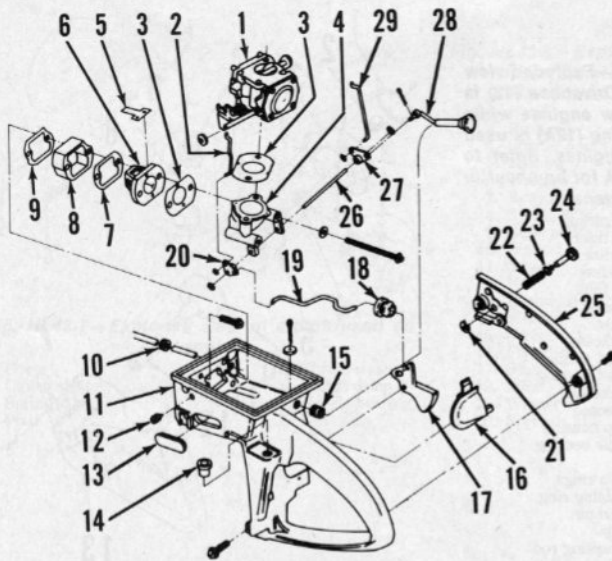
Exploded view of air box assembly on Super XL engine.
